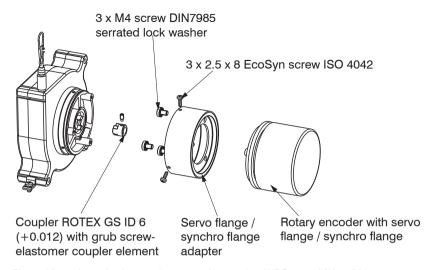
Mounting of adapter flange and encoder, WPS-xxxx-MK88-M
